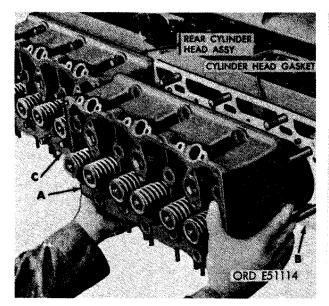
REMOVING OR INSTALLING CYLINDER HEAD ATTACHING PARTS.
